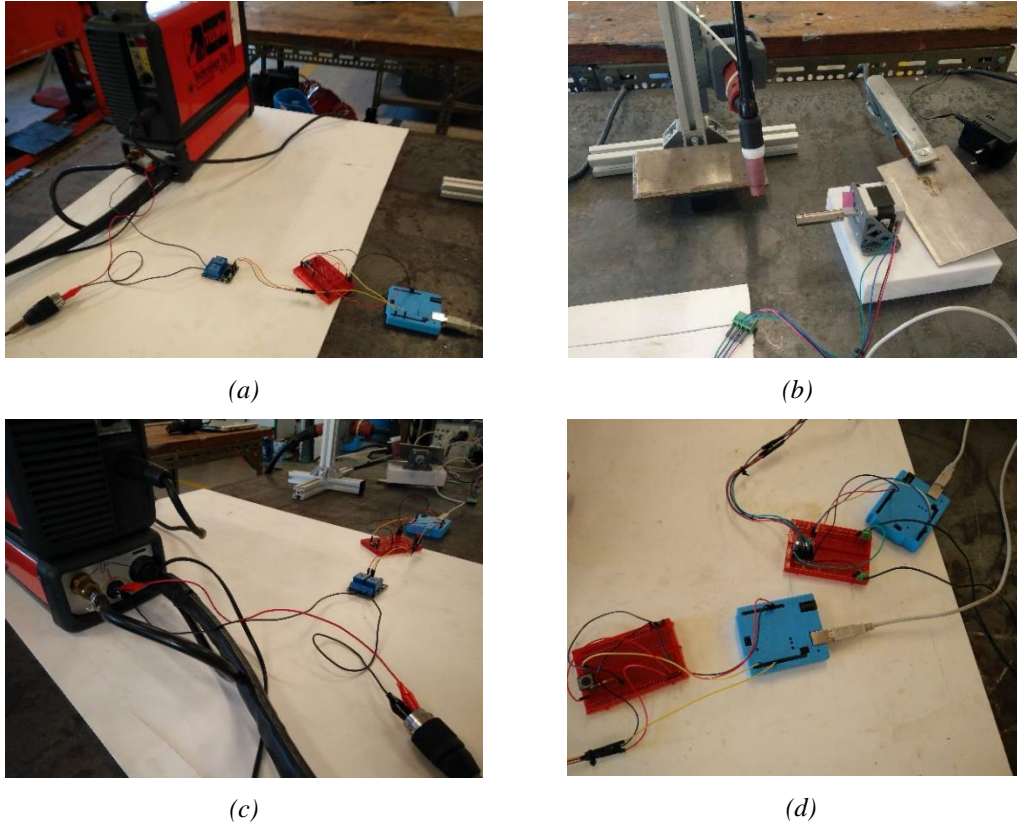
Welding equipment. Welding machine and trigger system (a), (c); motion system and welding torch (b); trigger and motion system (d).
